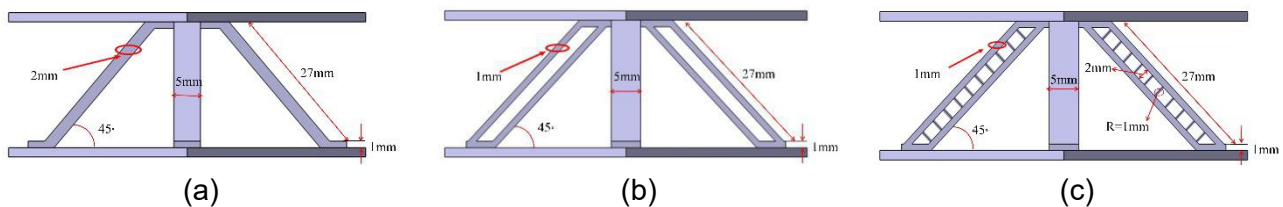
Diagram of shape and size of test piece: (a)P-type; (b)MH-type; (c)MP-type;
